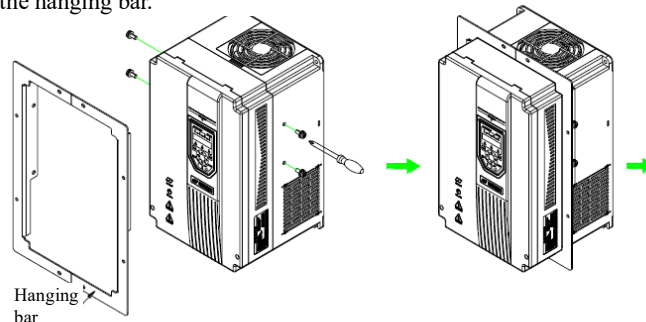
Wall-mounted Installation for Hope530G45T4-H~Hope530G375T4-H Models
